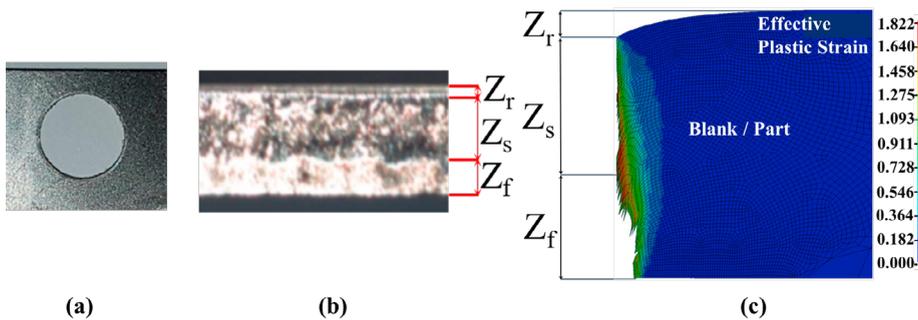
(a) Top view of workpiece, blanked edge characteristics using (b) experiment and (c) simulation.
